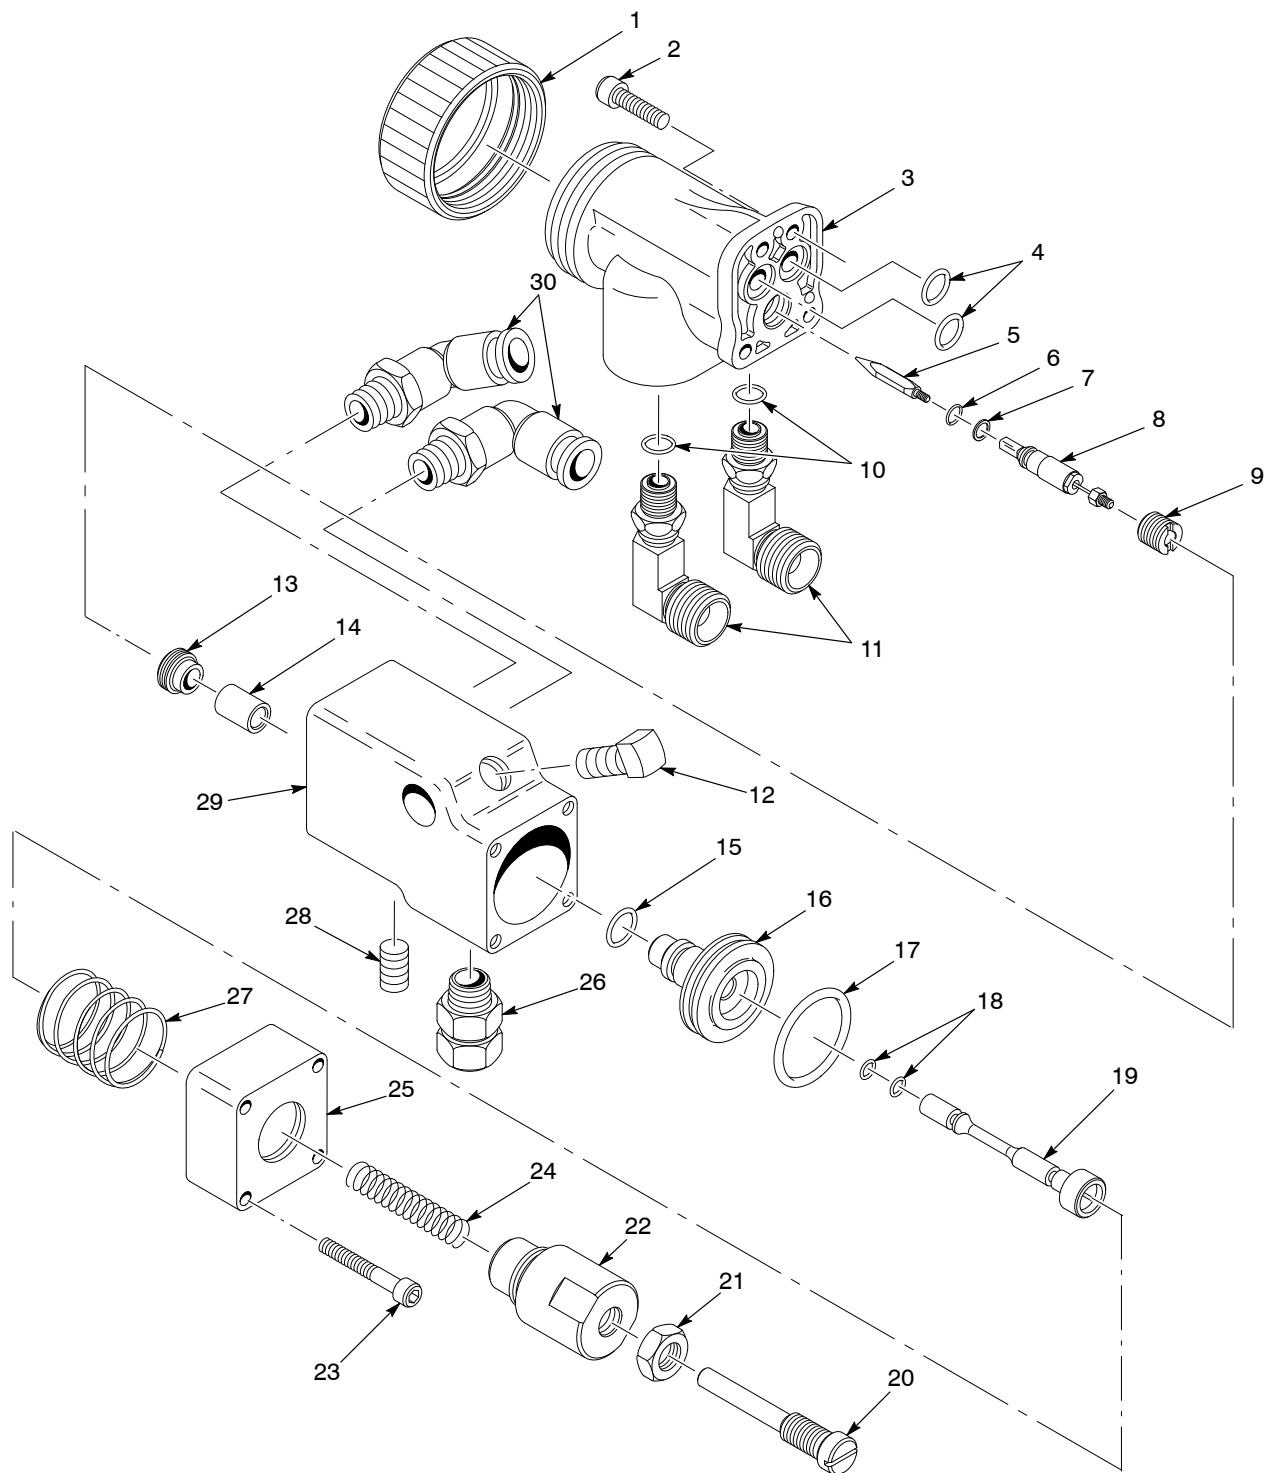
Circulating Spray Gun Parts – Circulating Gun Shown
